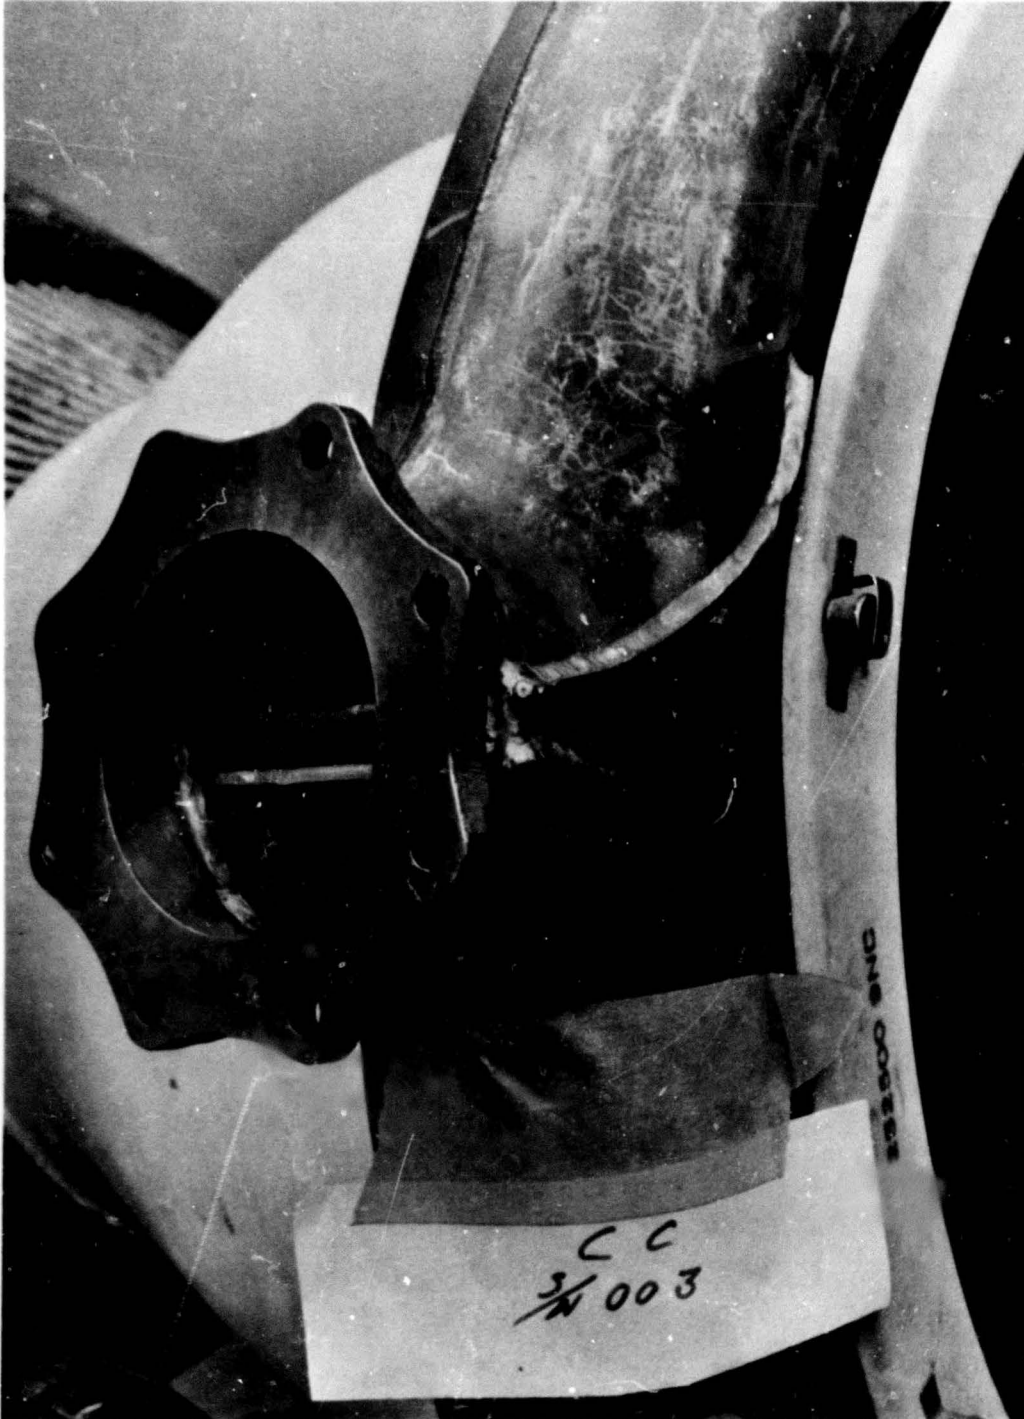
Mounting Flange and Torus Changes -- Chamber S/N 003
